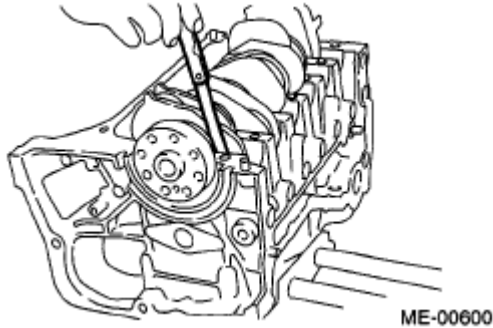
Measuring Thrust Clearance Of Crankshaft Center Bearing
